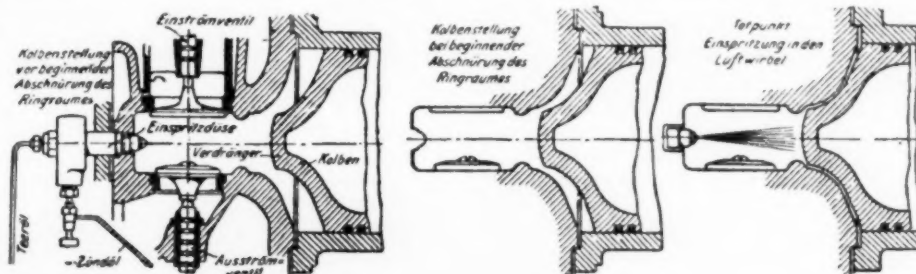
PRECOMBUSTION CHAMBER OF DEUTZ DIESEL ENGINE
